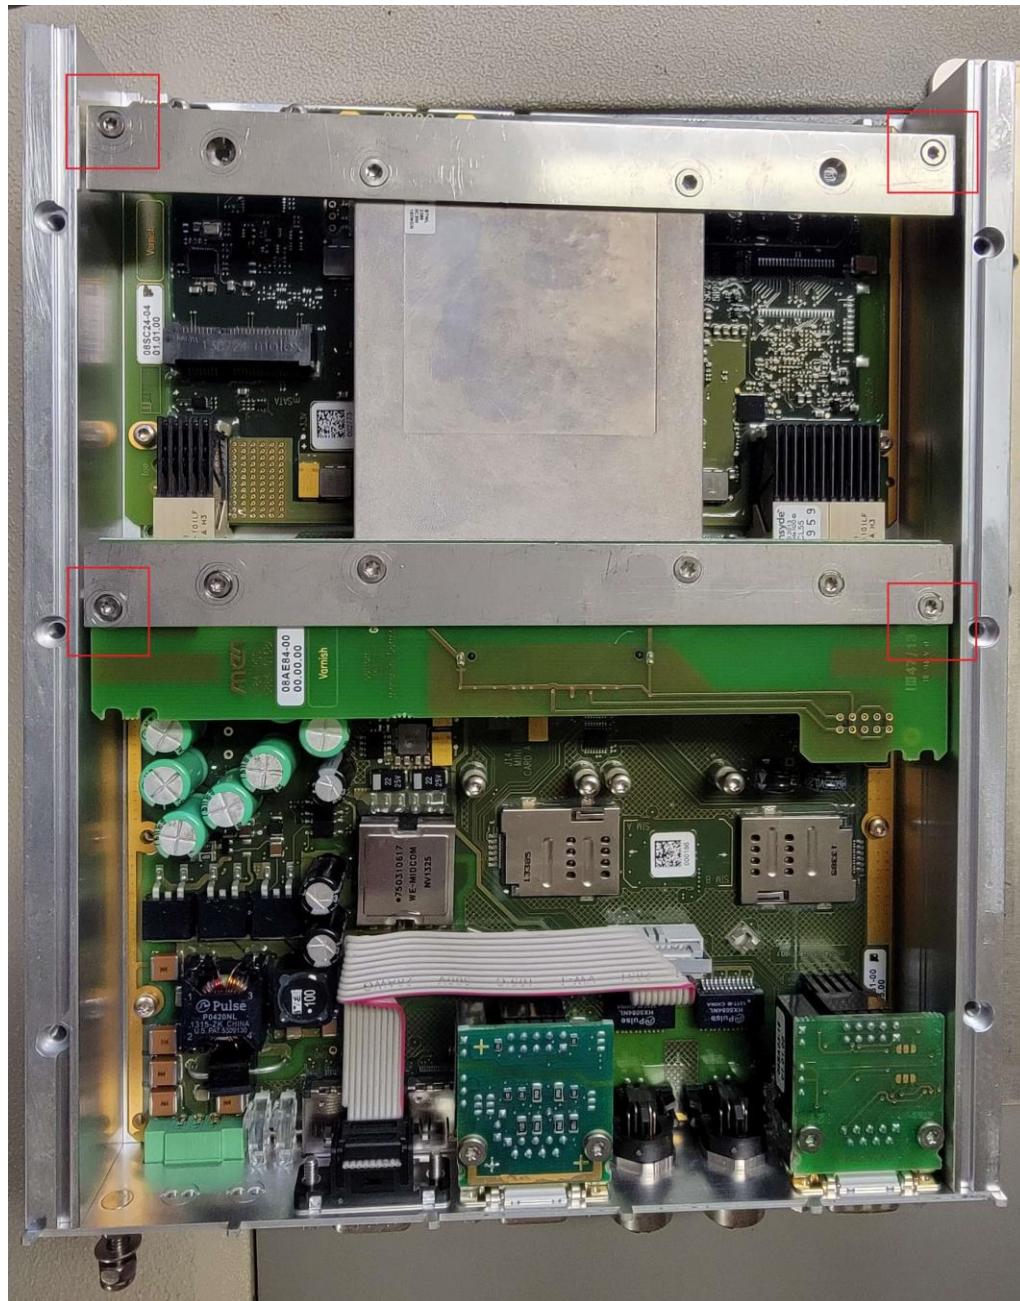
CCU / MDS SSD Assembly with T8 Screws
